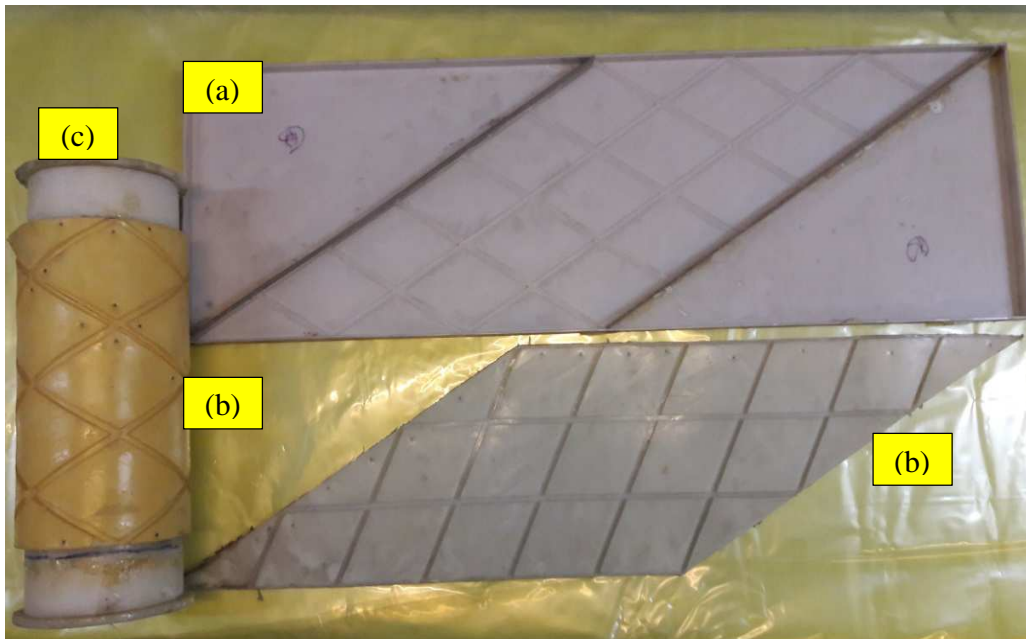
Fabrication tools, (a) Poxi glass tool, (b) Silicone rubber mold (c) polyethylene mandrel.
